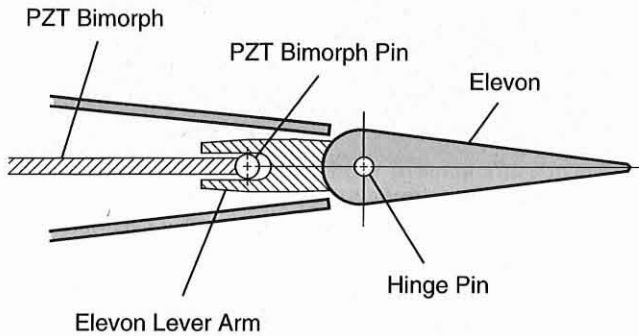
Trailing edge of active elevon section showing PZT bimorph bender beam and details of elevon lever arm mechanism (approximate scale).
